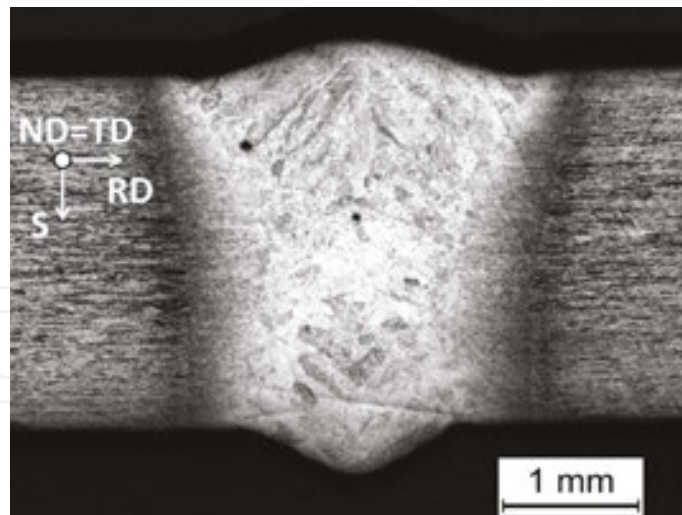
Transverse cross section macrograph of the laser beam welded Ti-6Al-4V butt joint.
